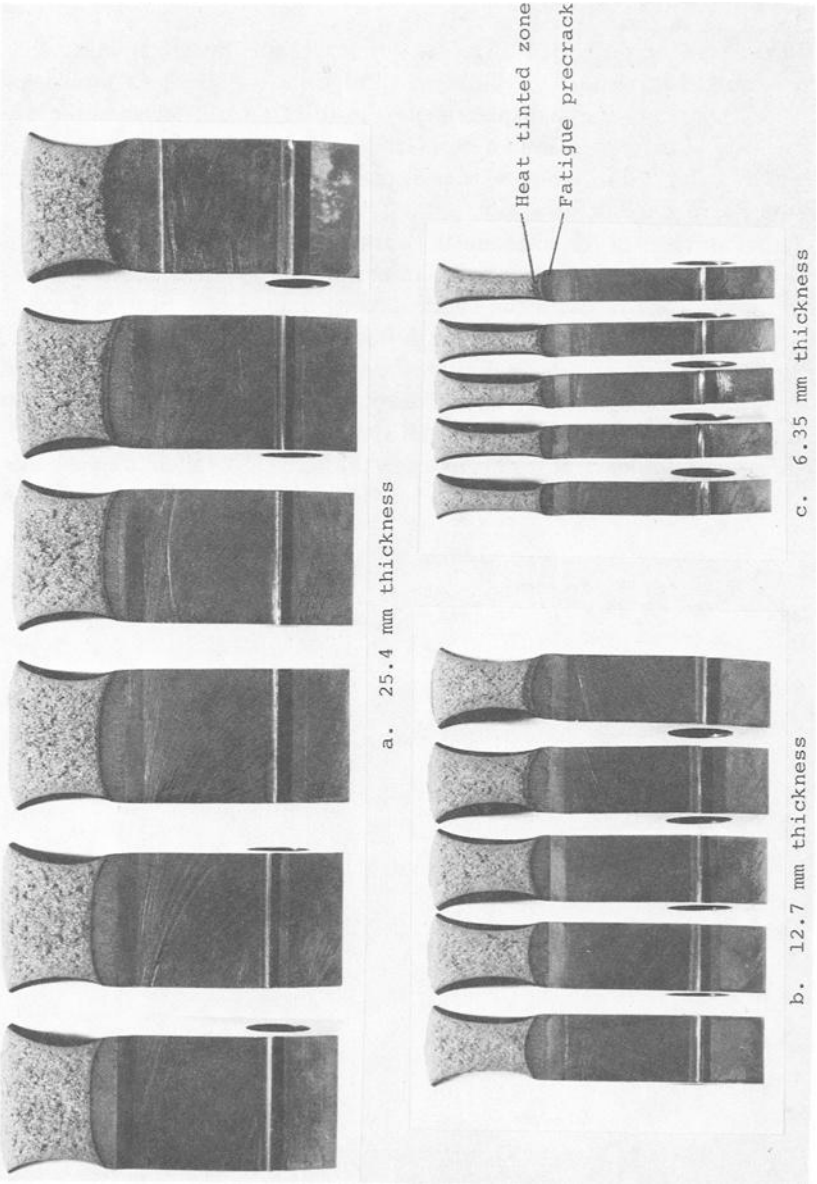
Fracture surfaces of type 316 stainless steel compact specimens.
